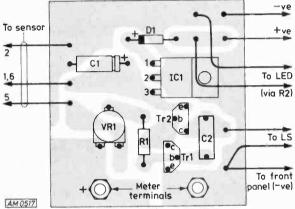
, top, is the full size drawing of the PCB with the component layout, Fig. 3b, below.
